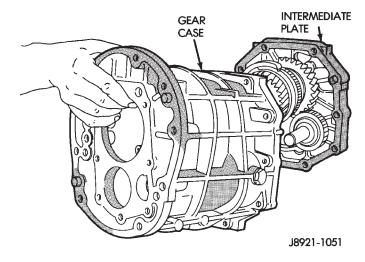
Install Transmission Gear Case to the Intermediate Plate
